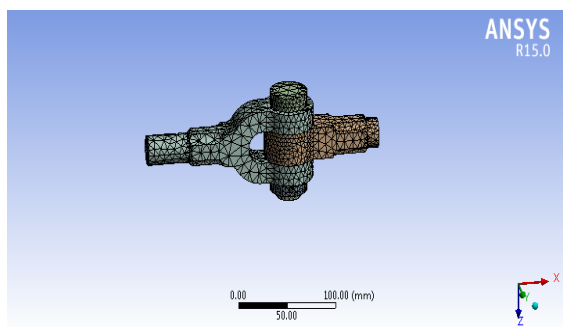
ASSEMBLE MODEL OF KNUCKLE JOINT
